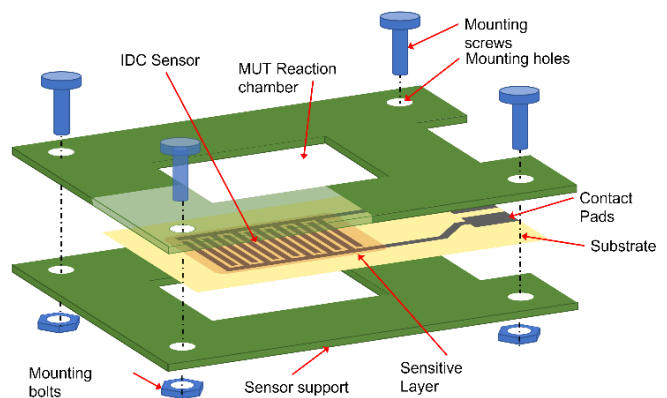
Structure of the sensor (exploded 3D view) including the supporting frame of the experimental set-up.
